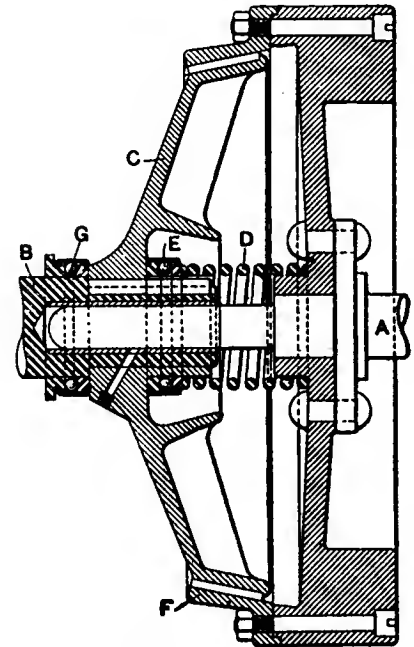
INTERNAL FLYWHEEL CLUTCH.
